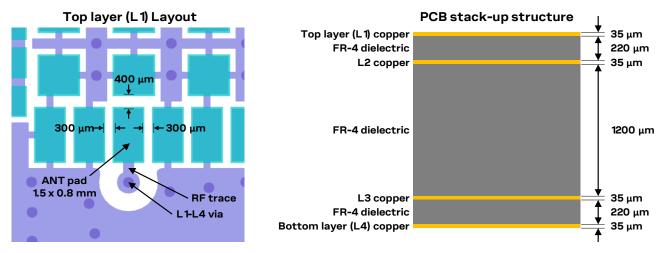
Top layer layout and stack-up structure of the u-blox host PCB for the ANT pad of the module
